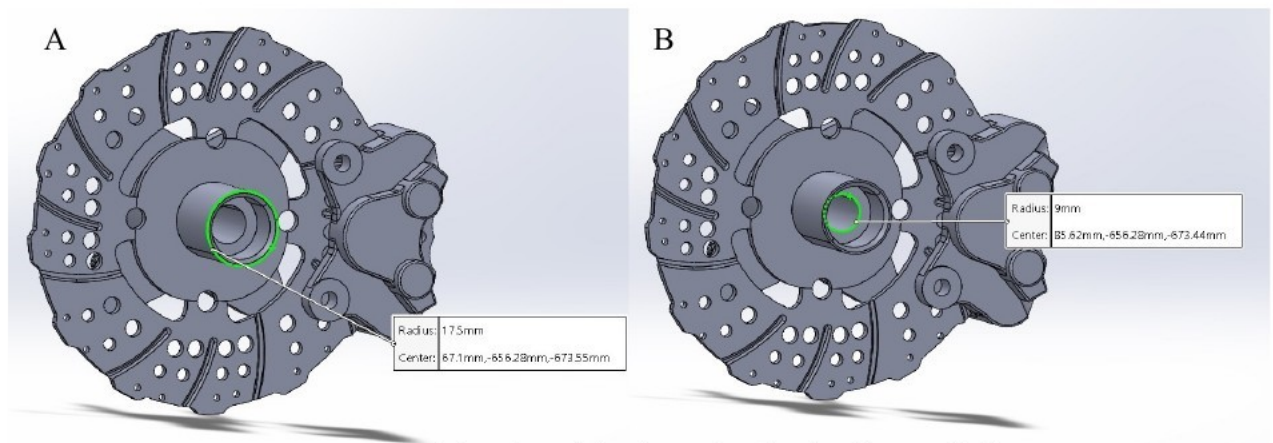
Outer(A) and inner(B) radius within the wheel bearing [15]
